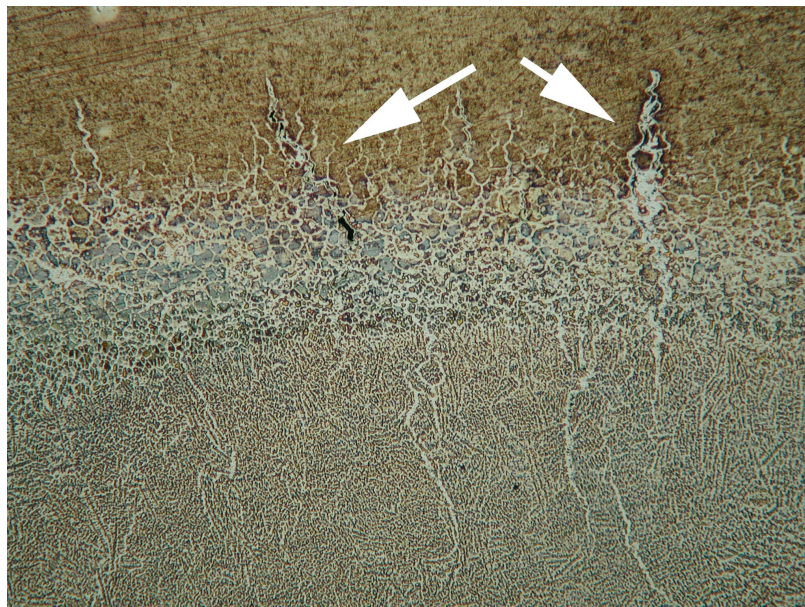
An example of type “A” crack. The crack is inside the weld metal zone and extended inside the PMZ. White river patterns are healed cracks. 50X; Weck etching.
